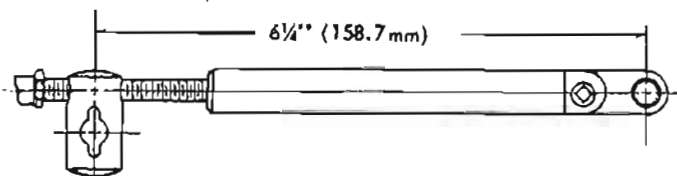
Inner Core Wire Extended 1-3/8" Shift Cable
